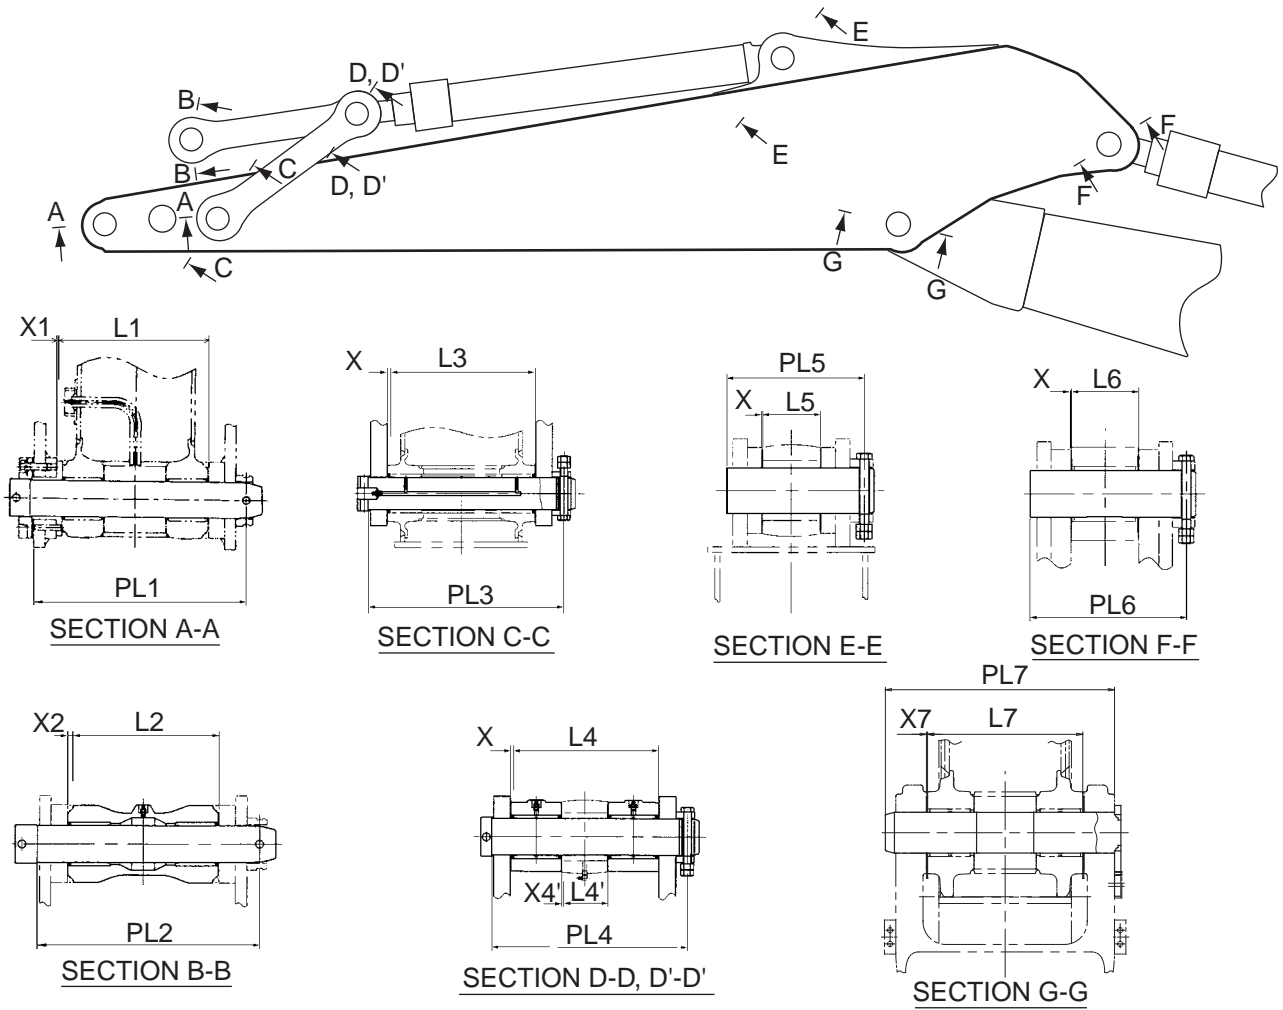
Clearance of arm and cylinder installing sections in thrust direction
